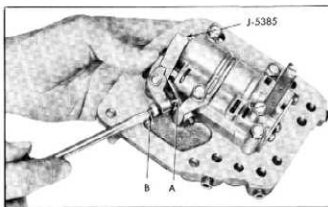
Setting (2) of Throttle Valve Inner Lever Adjustment
